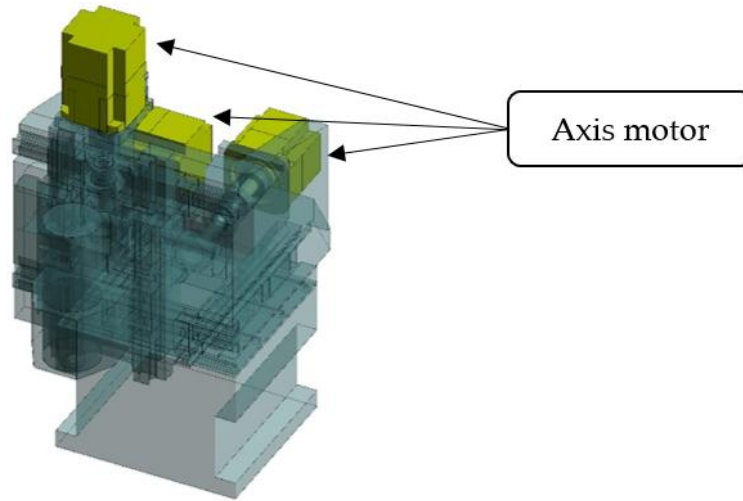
Axis motor in a single 3-axis CNC module, highlighted in yellow.
